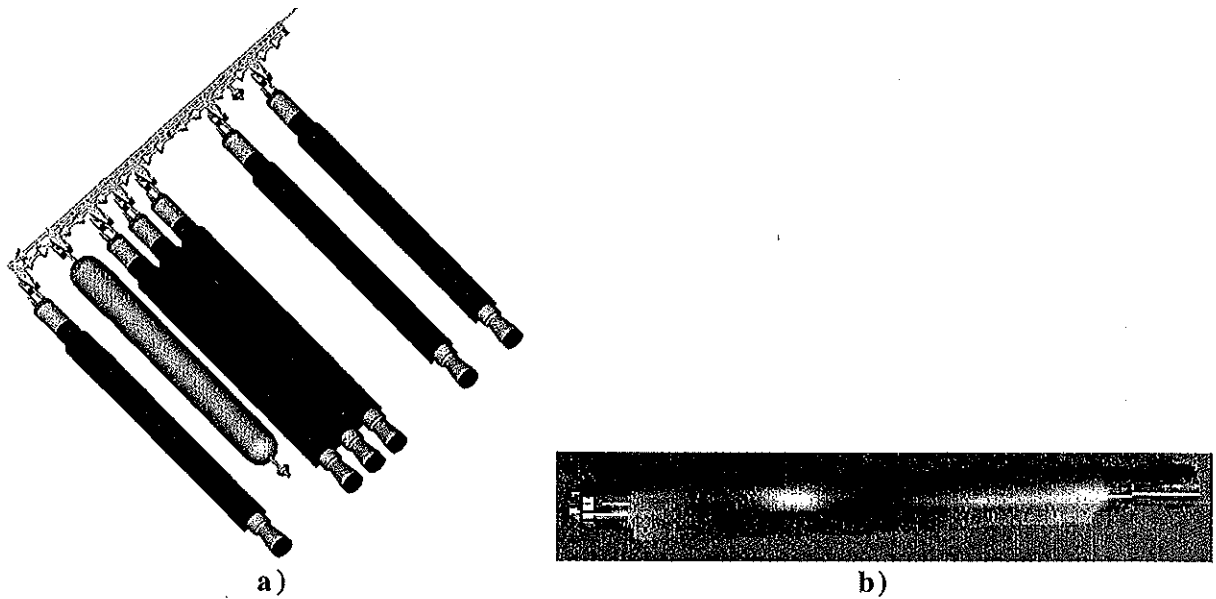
a) Mechanical Drawing of the Planck Surveyor Compressor Assembly. Each compressor bed for the Planck cooler is 45 cm long. The total compressor assembly mass is 35 kg. b) Photograph of a Single Compressor Bed. This length can be reduced to 2 cm for a 35 K precooled ARISE cooler, or 18 cm with a 60 K precooler.
